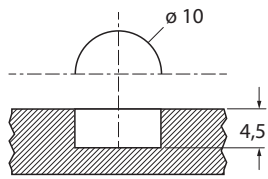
Hole dimensions for inserting the tag in metal (TW-R10...)
